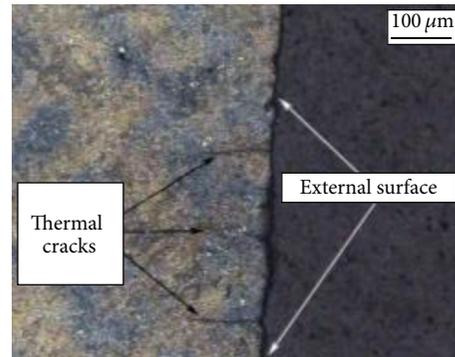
Heat cracks with the internal cooling circuit shape.
